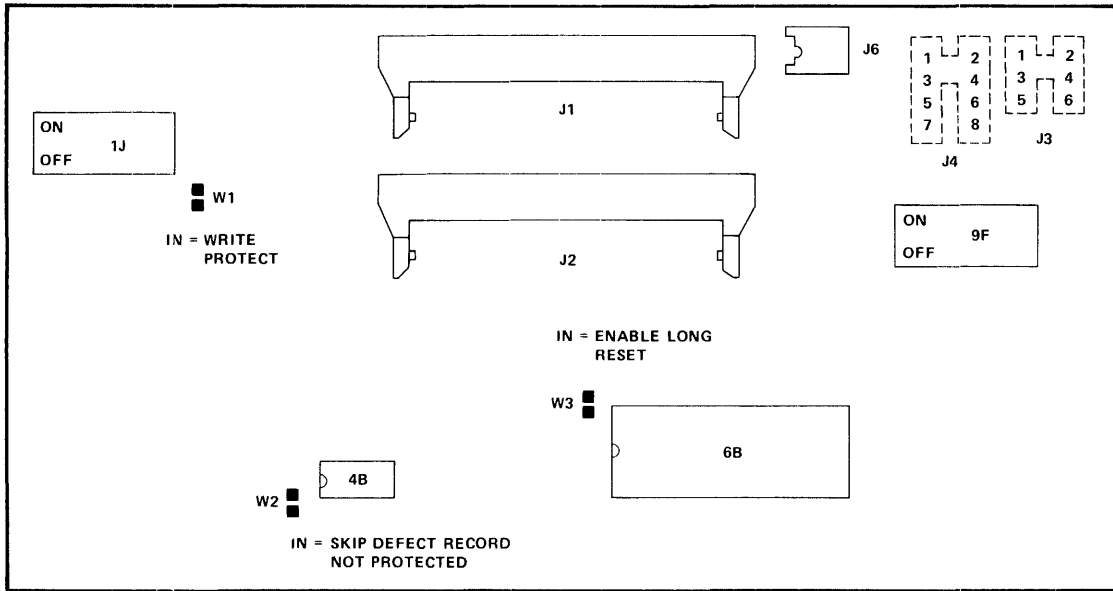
Jumper Definitions and Locations and DIP Switch Locations for PCB Assembly 200208/200398
